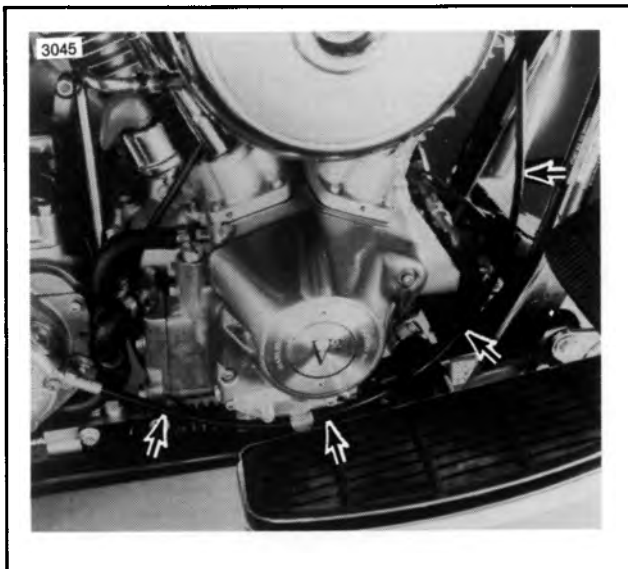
FLHT Cable Routing — Right Side, 1987 and Later
